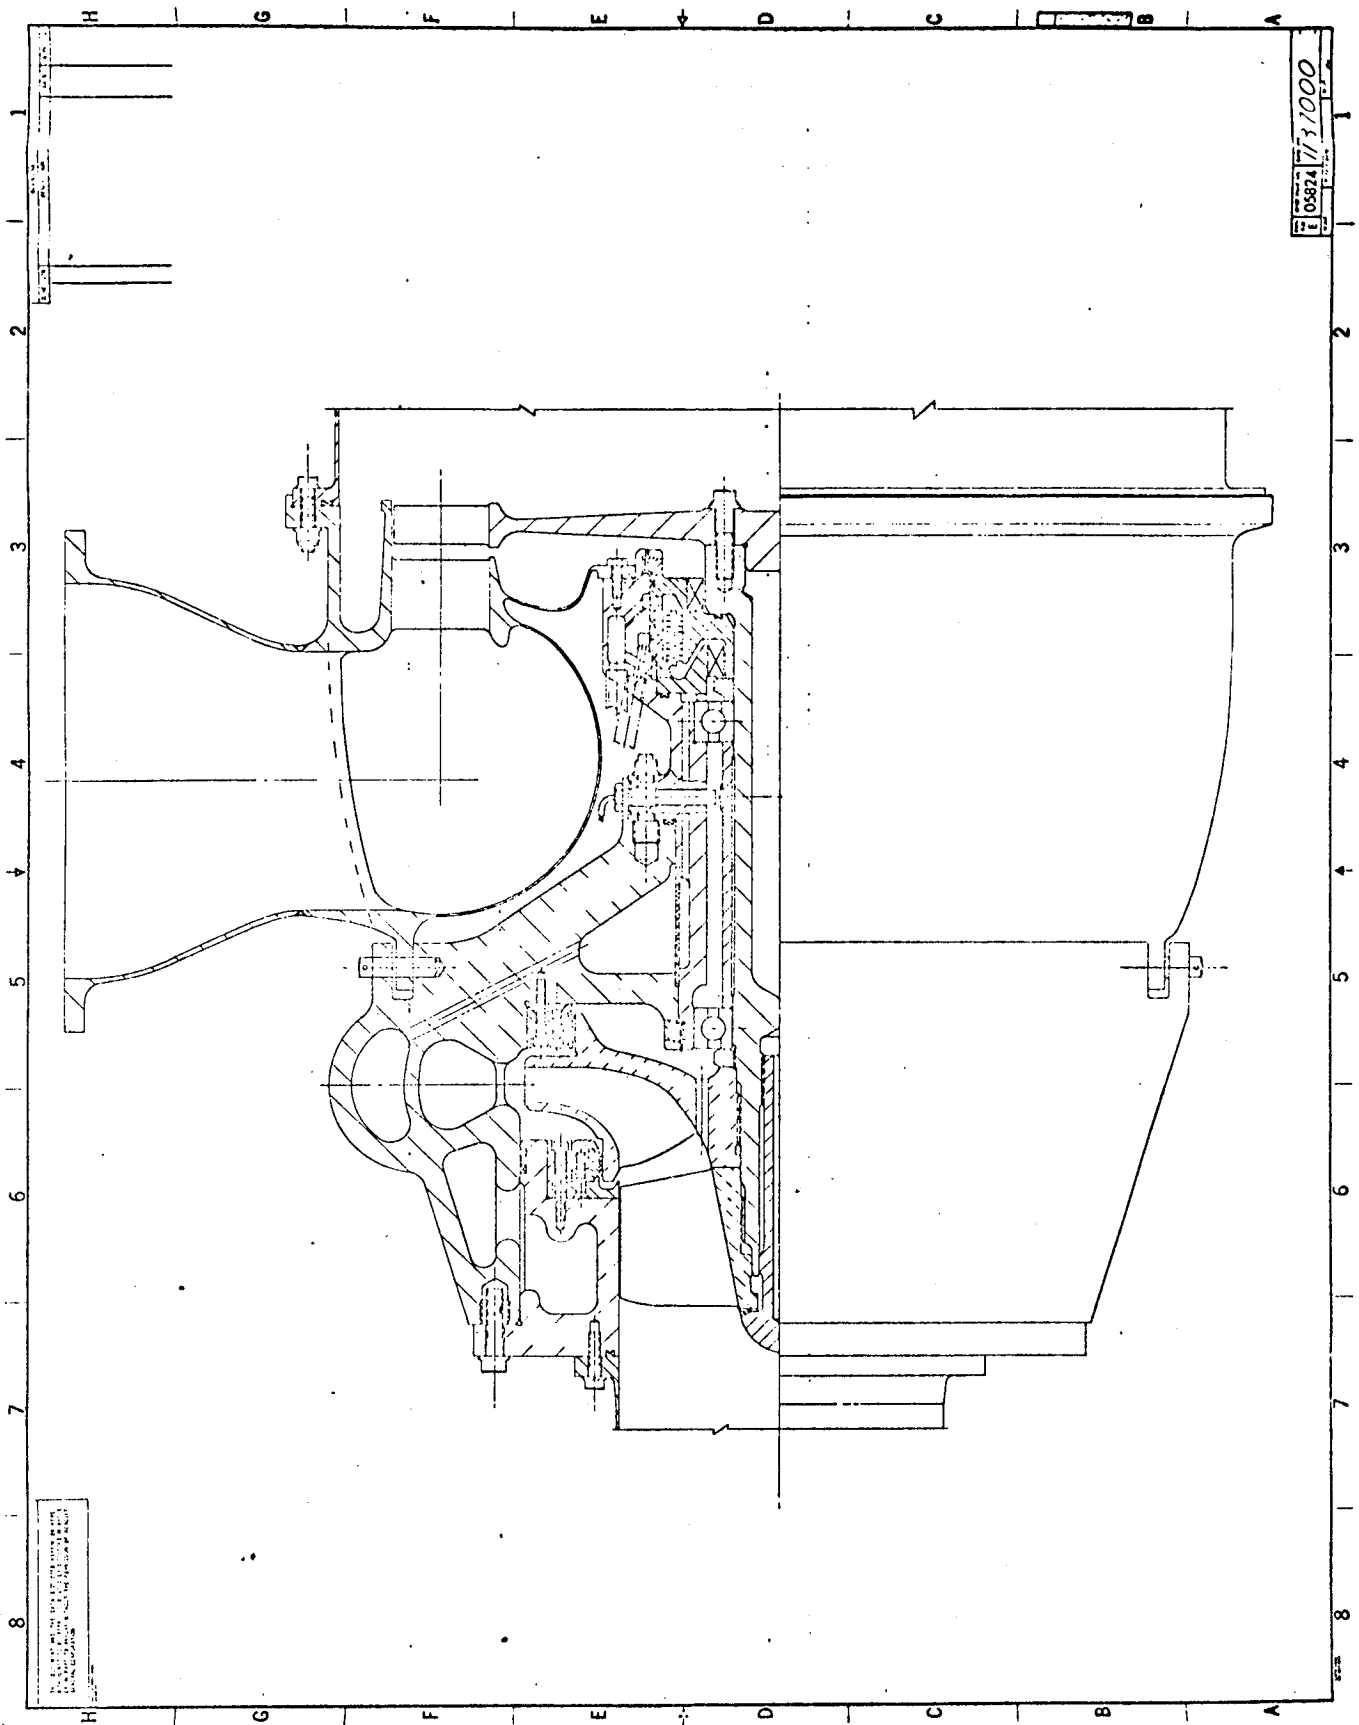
LOX Turbopump Assembly (Sheet 2 of 2)
